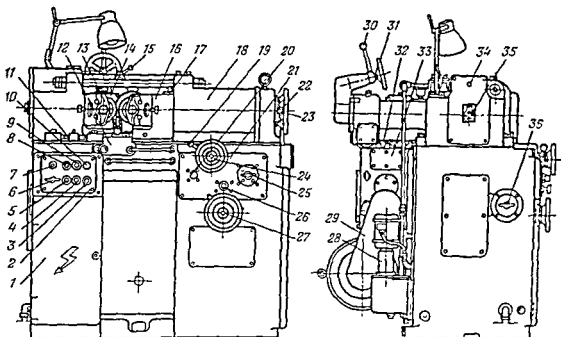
Cylindrical-die thread-rolling machine, model 5A935;
